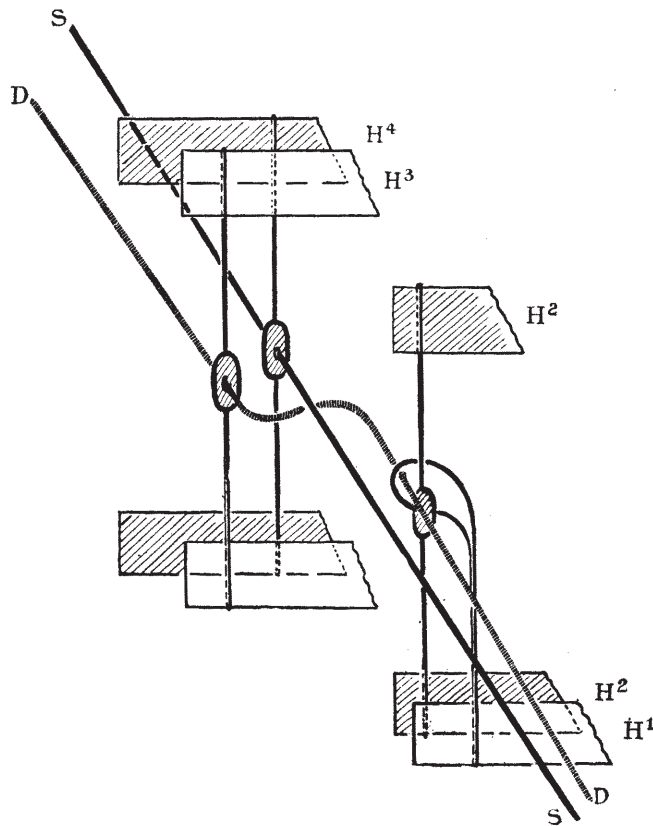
A.—HEALD-SHAFT MOUNTING—PLAIN GAUZE.
